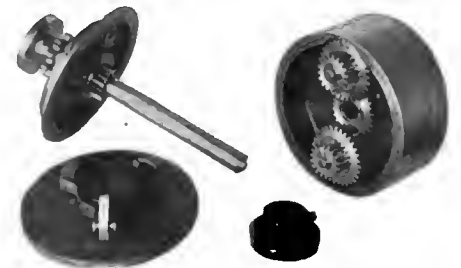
PLANETARY GEAR OF MICHIGAN CAR.
